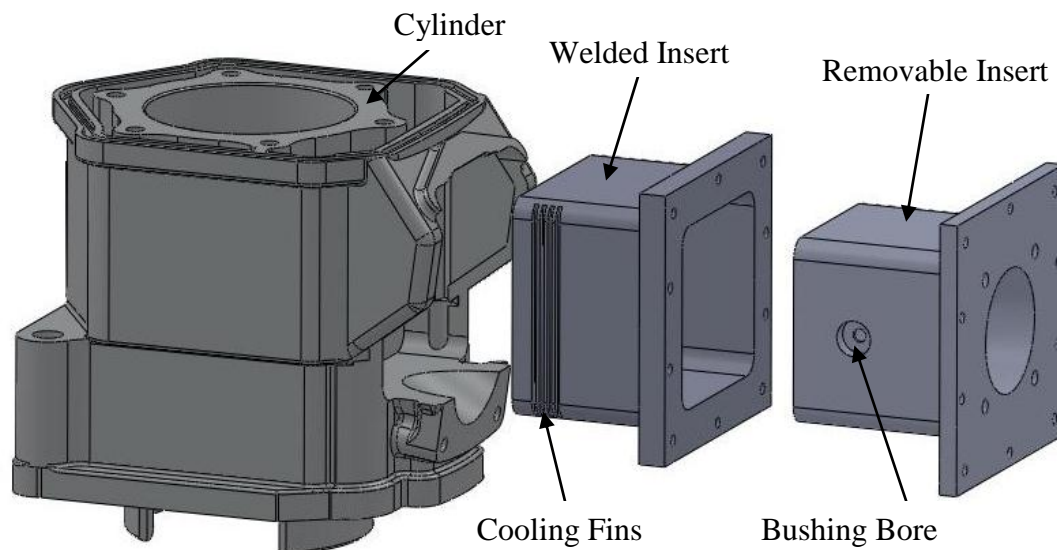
SCT Cylinder- Exploded View of Cylinder, Welded and Removable Insert
